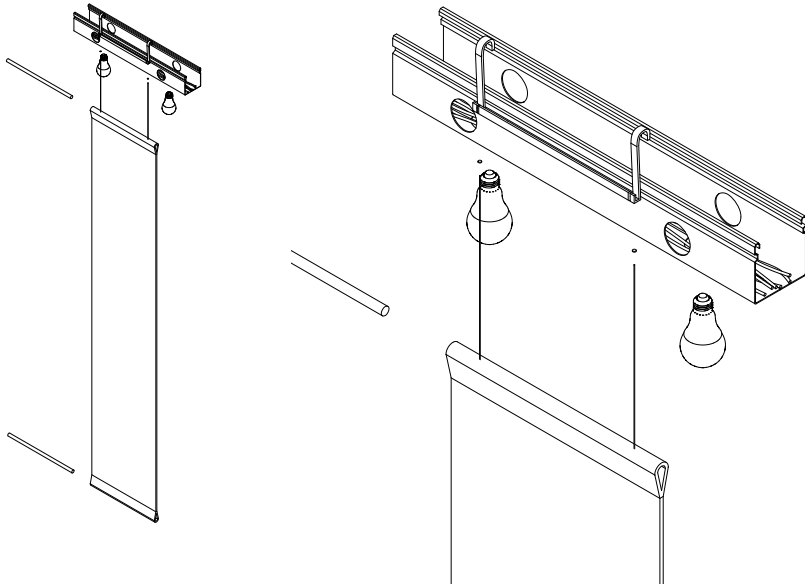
Construction detail - Illuminated display element and hanging systems | Axonometric views.
